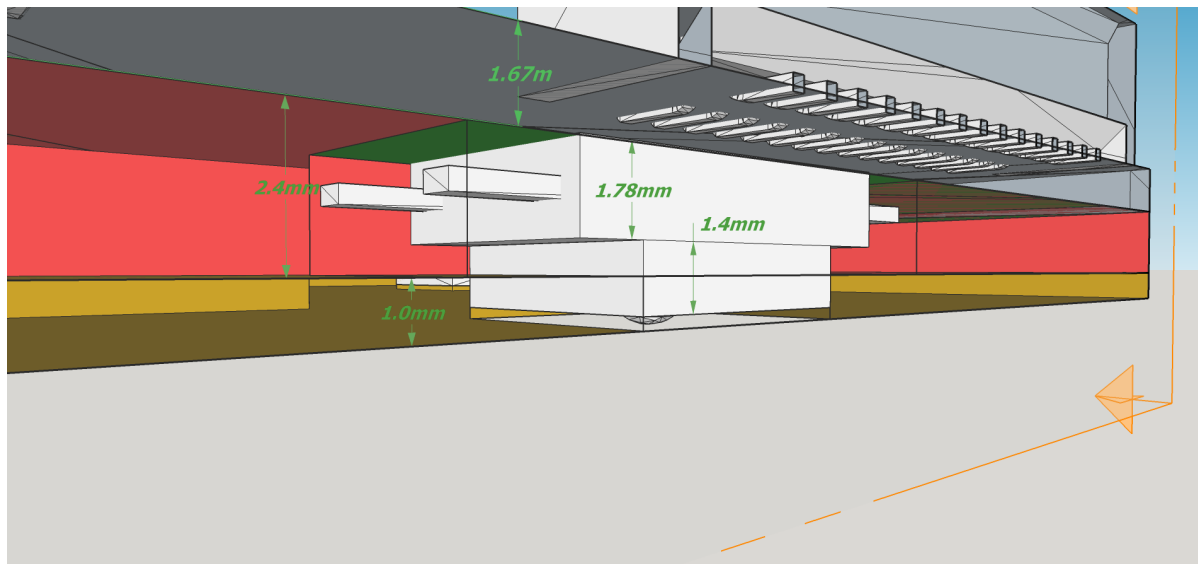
A sectional view of the 3D model of the MAR electrode. It shows the thickness of the three pcbs. The force sensor is placed at the bottom of Sensor PCB
